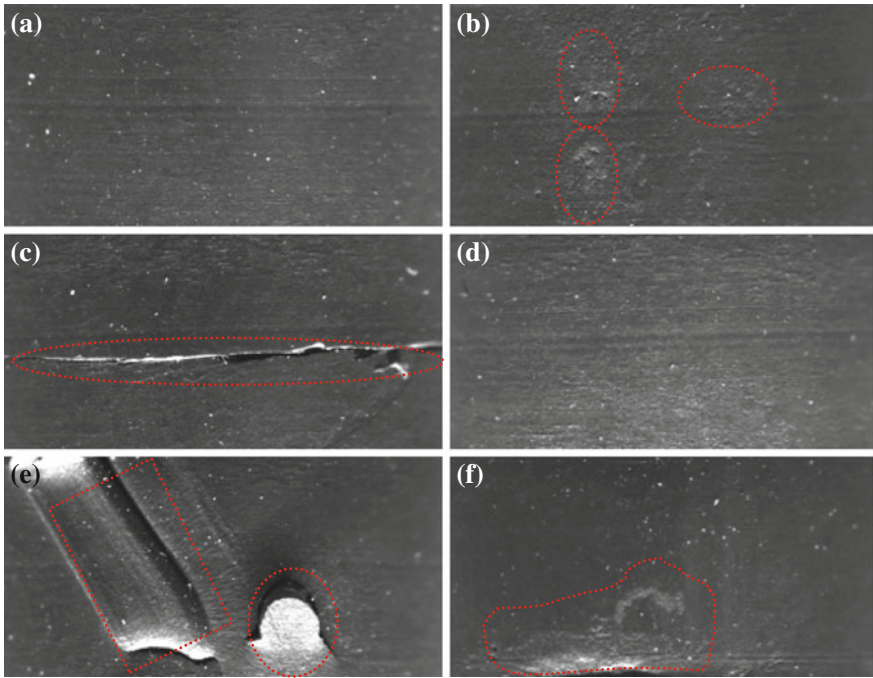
Example defects, the mark shows the location of defects a No defects, b blow holes, c crack, d blemishes, e overlap, f No defects
